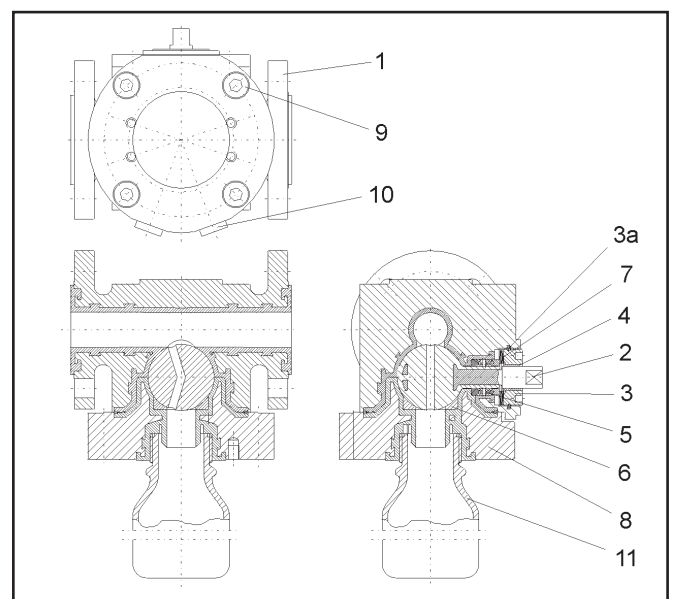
Sectional view of sampling valve series 27e => Parts list see Table 1 on page 2
